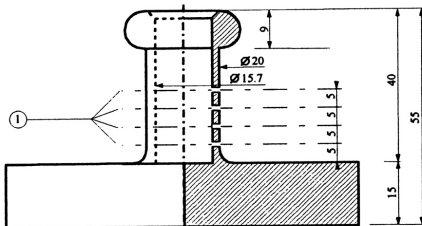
Hollow bronze cylinder, closed at one end; Plan and cut dimensions in mm
